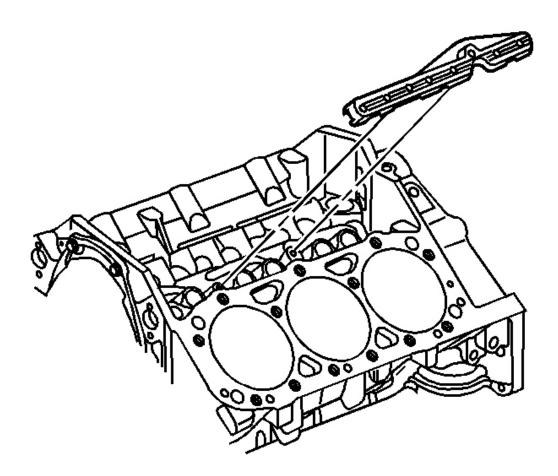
View Of Valve Lifter Pushrod Guides Courtesy of GENERAL MOTORS CORP.
